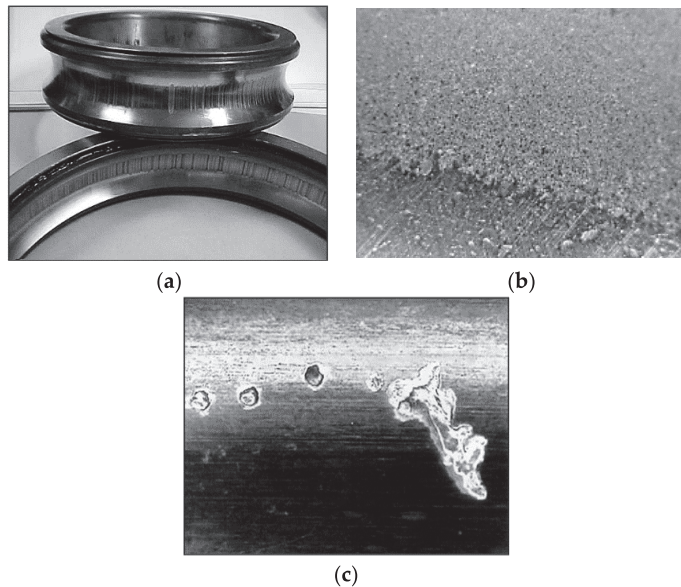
The visual appearance of shaft currents on the surfaces of the bearings: (a) fluting, (b) frosting, (c) pitting [29,30].
